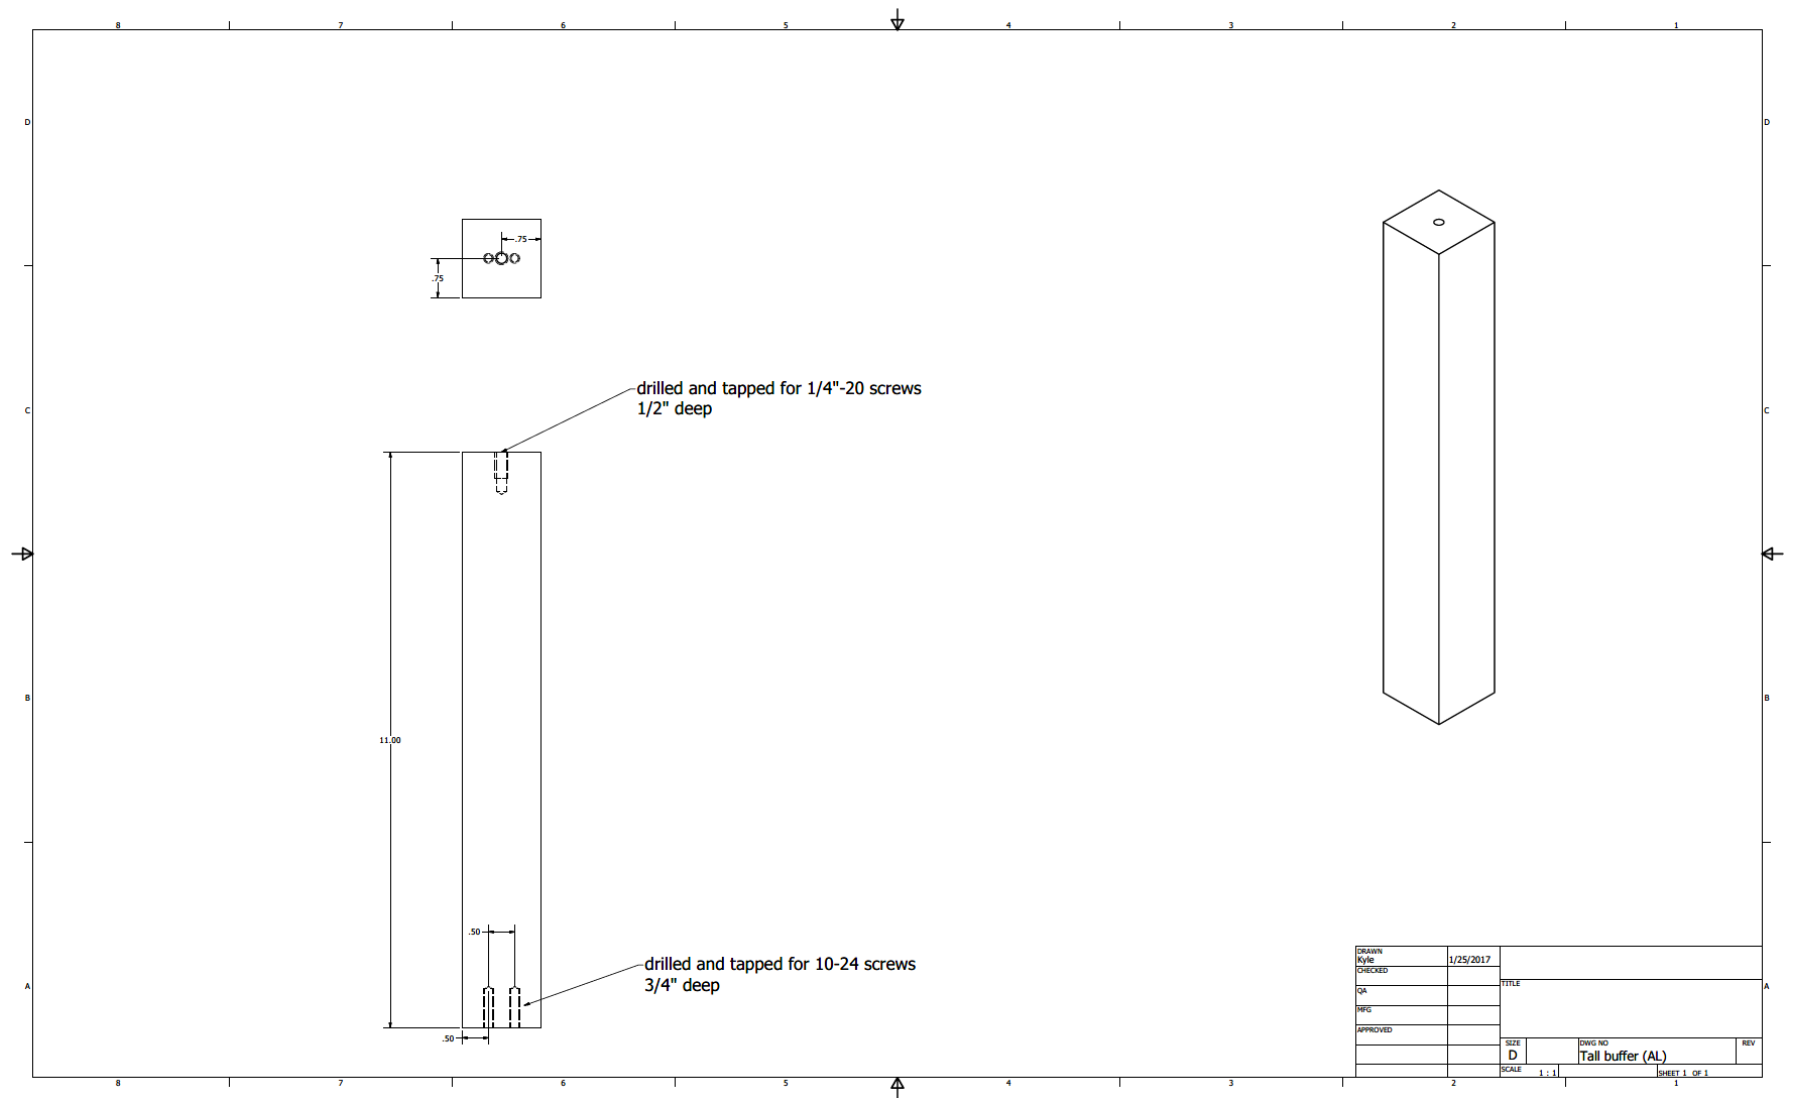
Aluminum pillar. Bottom (2 holes) connects to adjustable plates. Top (1 hole) connects to steel tab.
